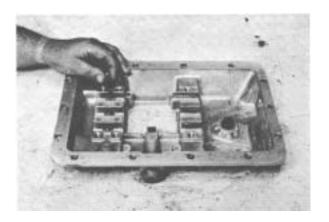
Remove mesh lock spring and lock ball - 3 each. Remove crossover interlock balls - 4 each.
